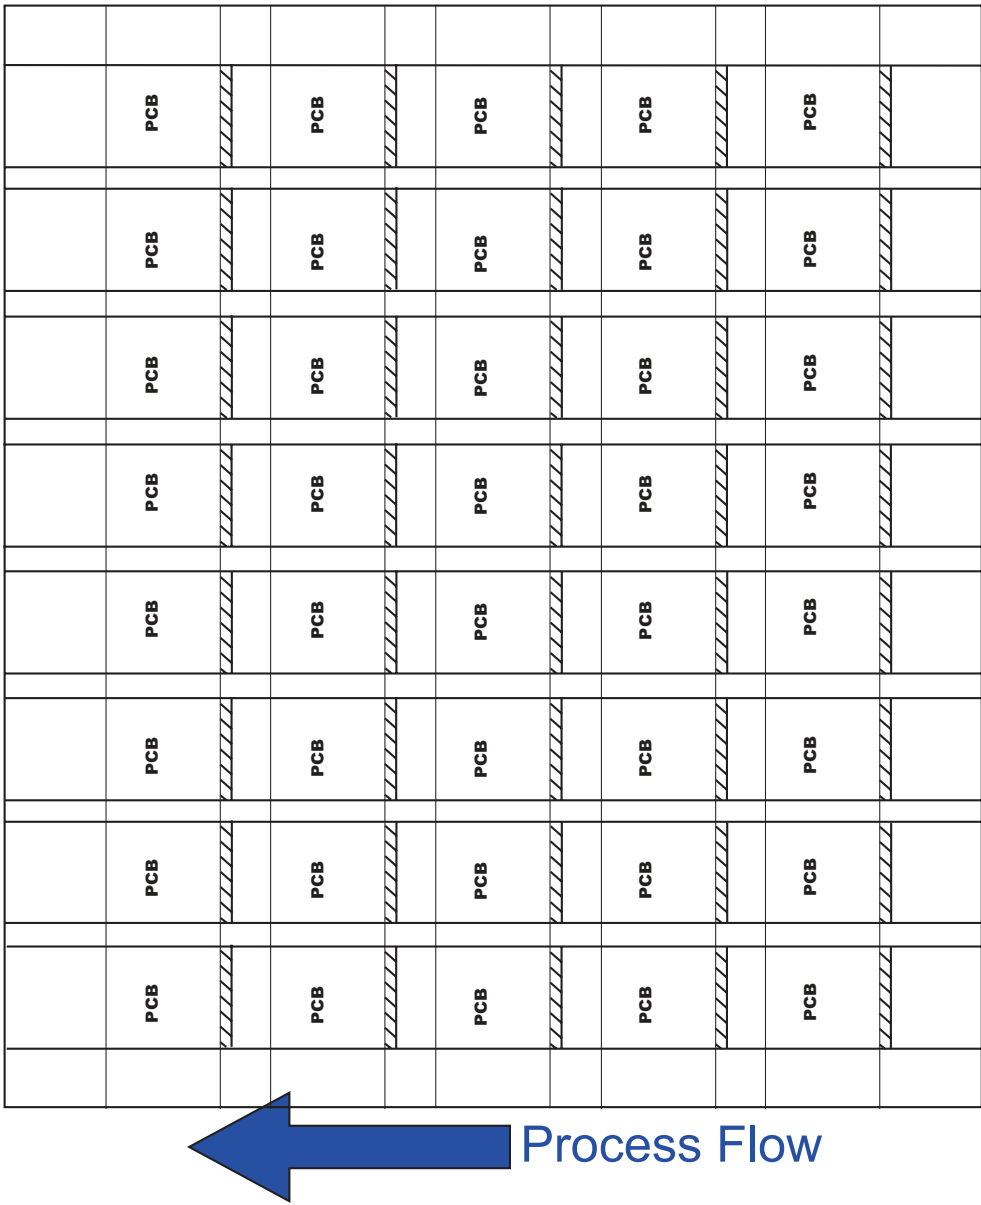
Revised PCBA layout with additional spacing for strength and the V-cut machine.
